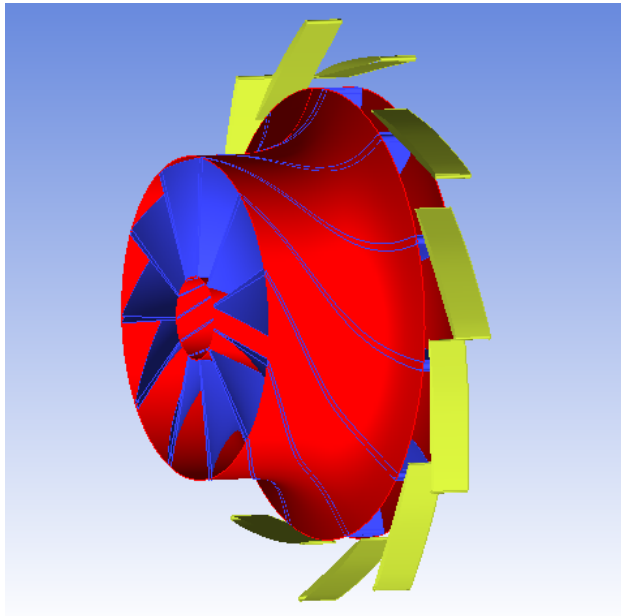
3D geometry generation test of the impeller and the nozzle vanes.
